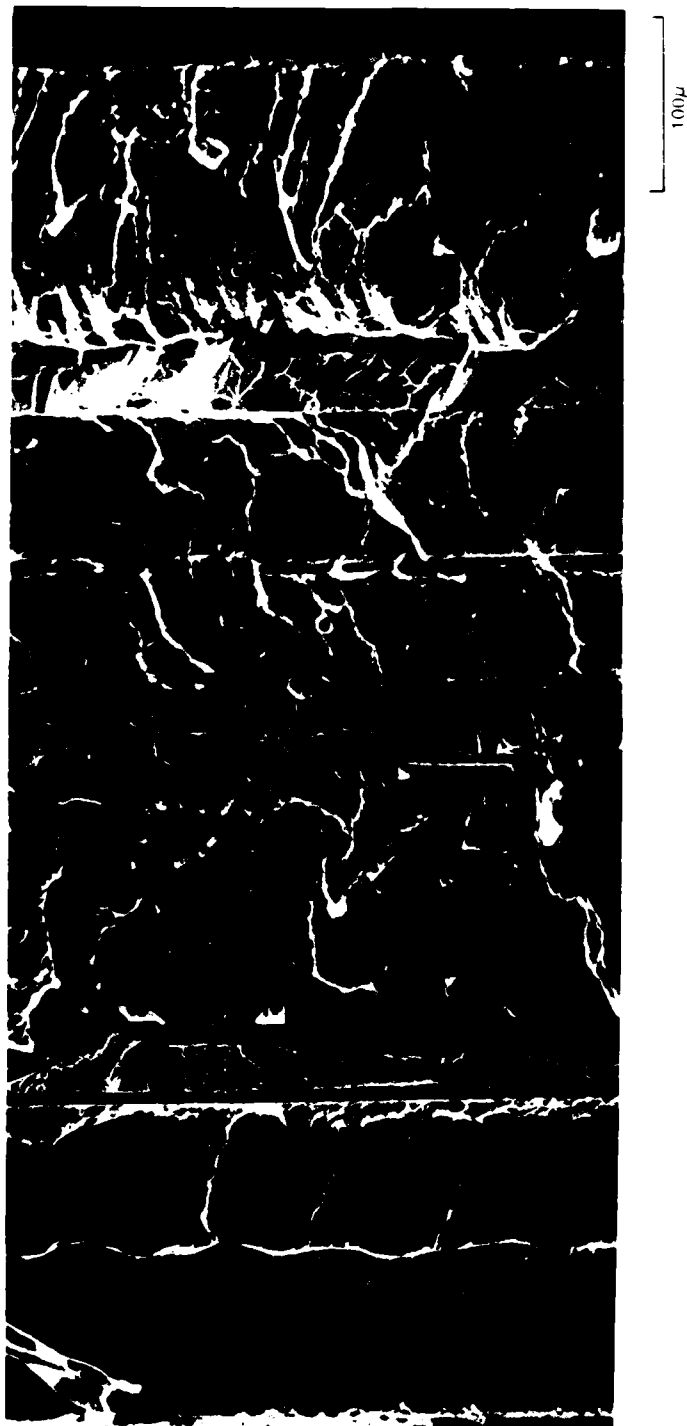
Transverse Tensile Fracture Surface. 0.5 mm in-ply Ribbon Spacing. Ribbon Fracture Observed.
